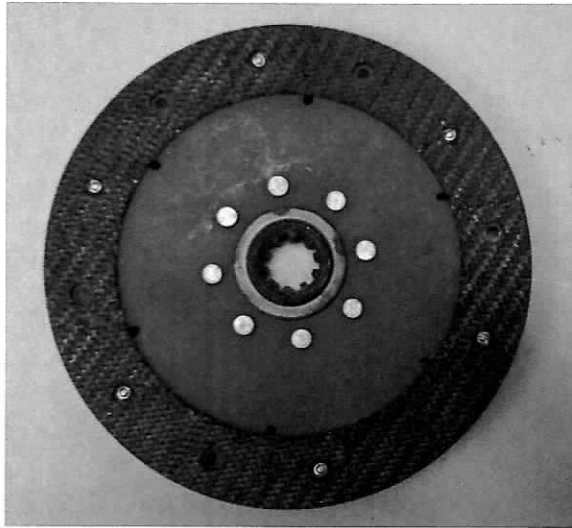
Clutch Carbon Composite Riveted to Clutch Spline Hub
